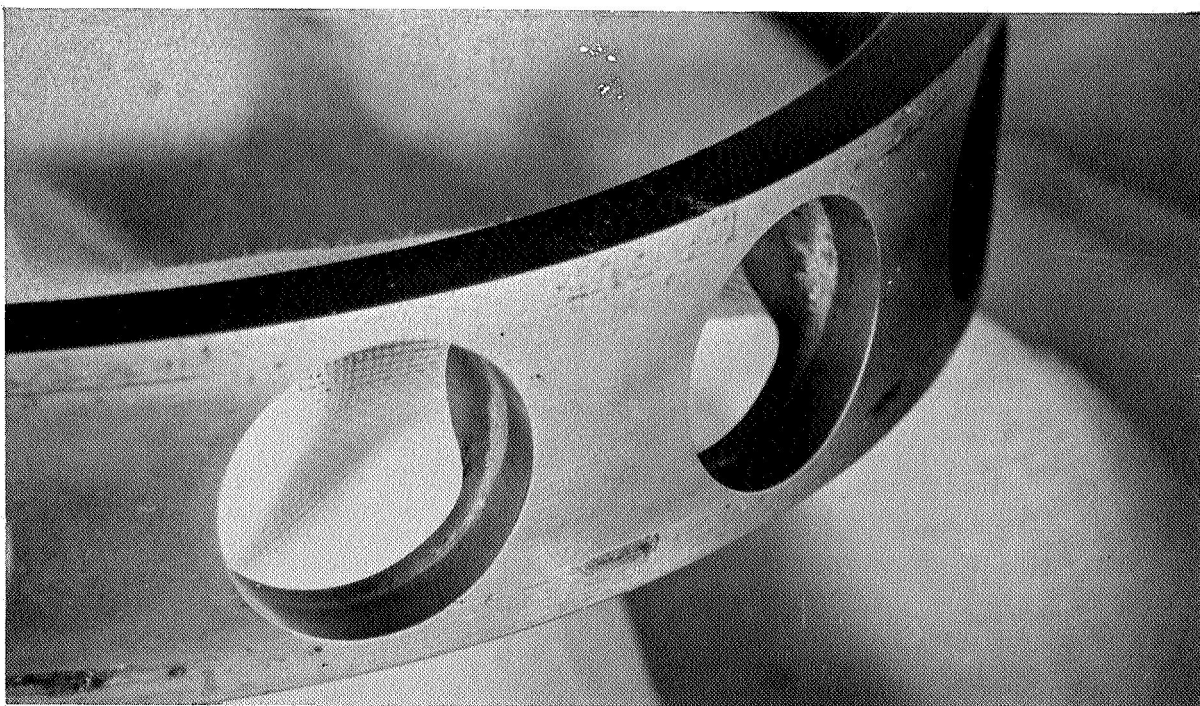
BEARING S/N 93. DAMAGED INNER RING
